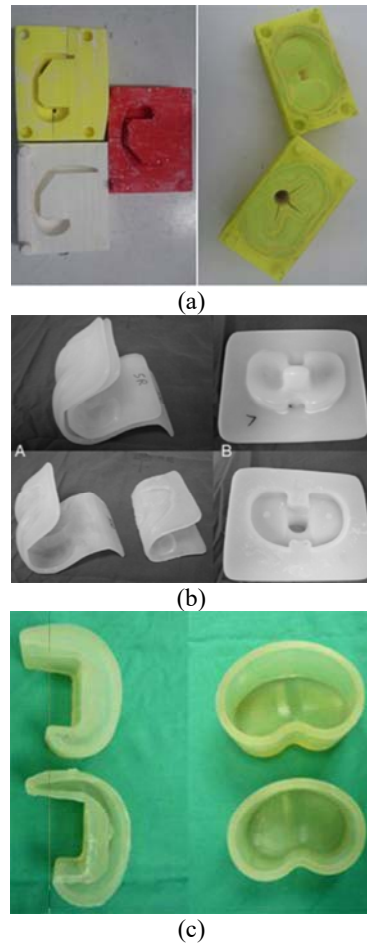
Articulating spacer mold: (a) ABS mold [9], (b) Polypropylene mold [4] and (c) Silicone mold [10]
